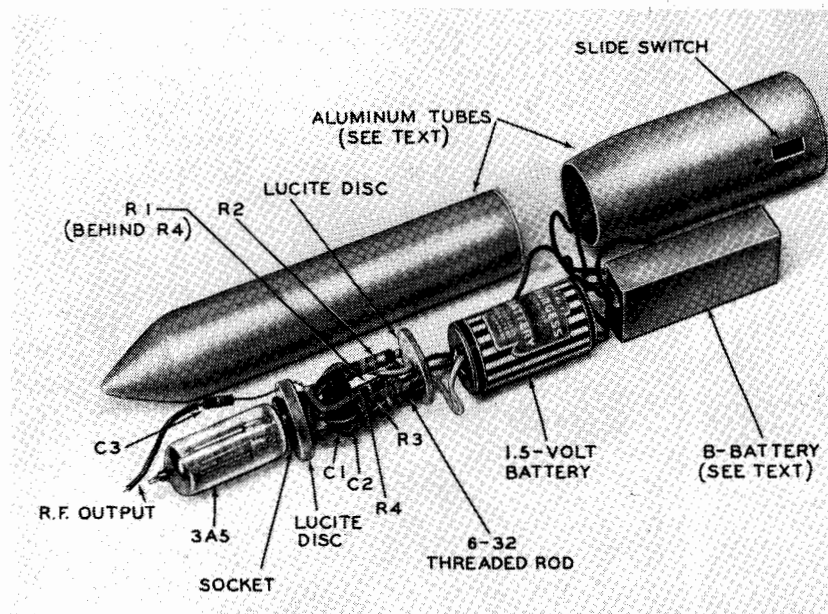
An exploded view of the Signal Launcher showing the location of parts.
